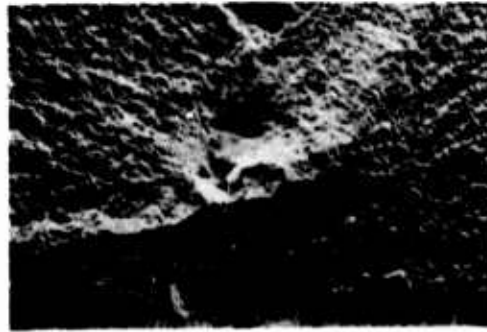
Fracture surfaces of specimen 1-4, showing fracture origin at ultrasonically detected 25 μm (0.001 inch) void.
